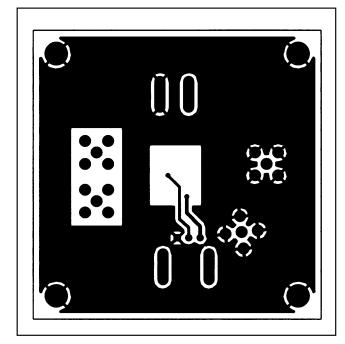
MAX4147 EV Kit PC Board Layout—Solder Side
